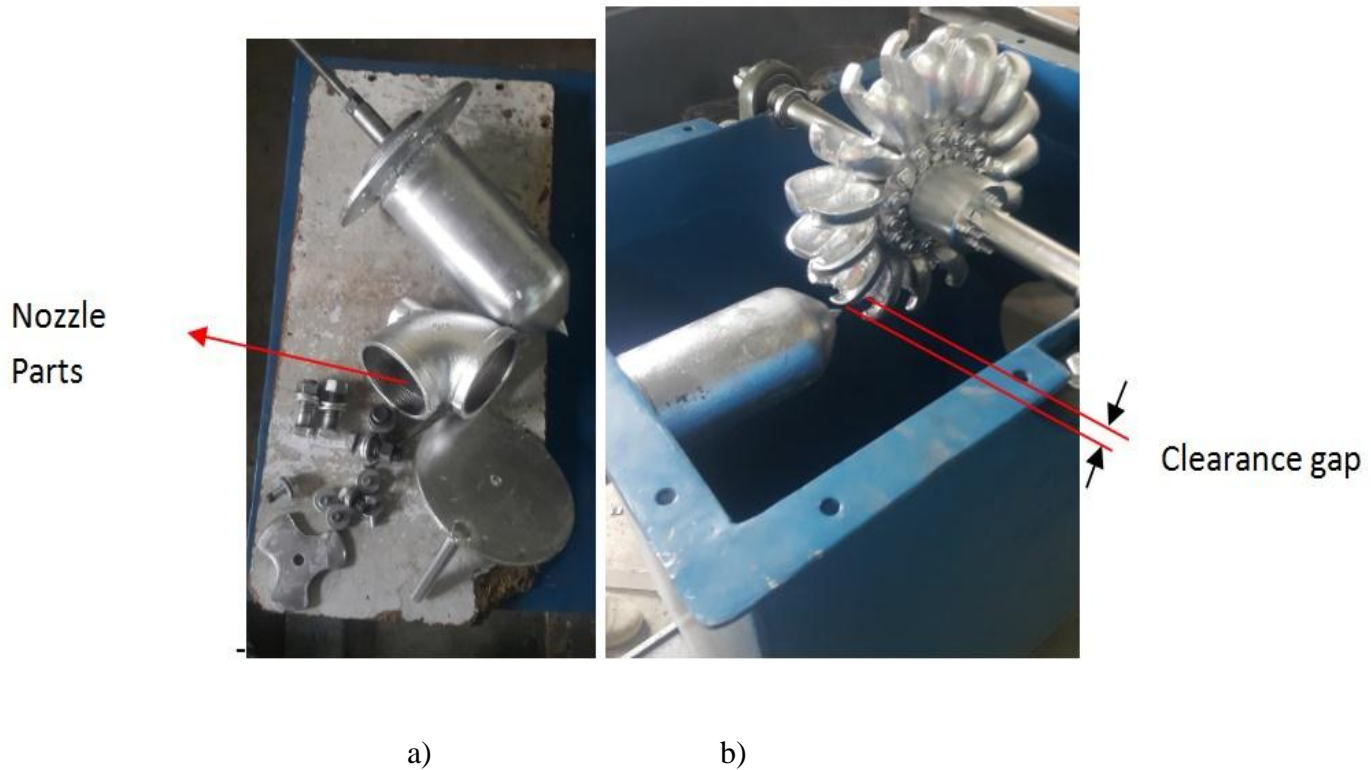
Photography of fixing of nozzle assembly a) Nozzle Parts b) Nozzle, Assembled Bucket, Lower casing
